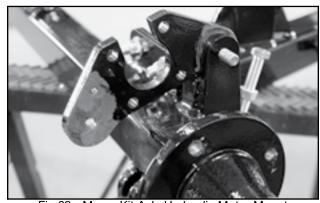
Mover Kit Axle Hydraulic Motor Mount
